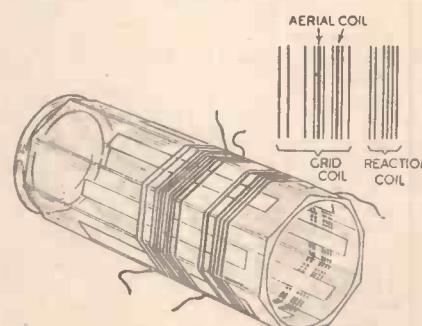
A novel method of making a low-loss self-supporting coil with 3 windings.
